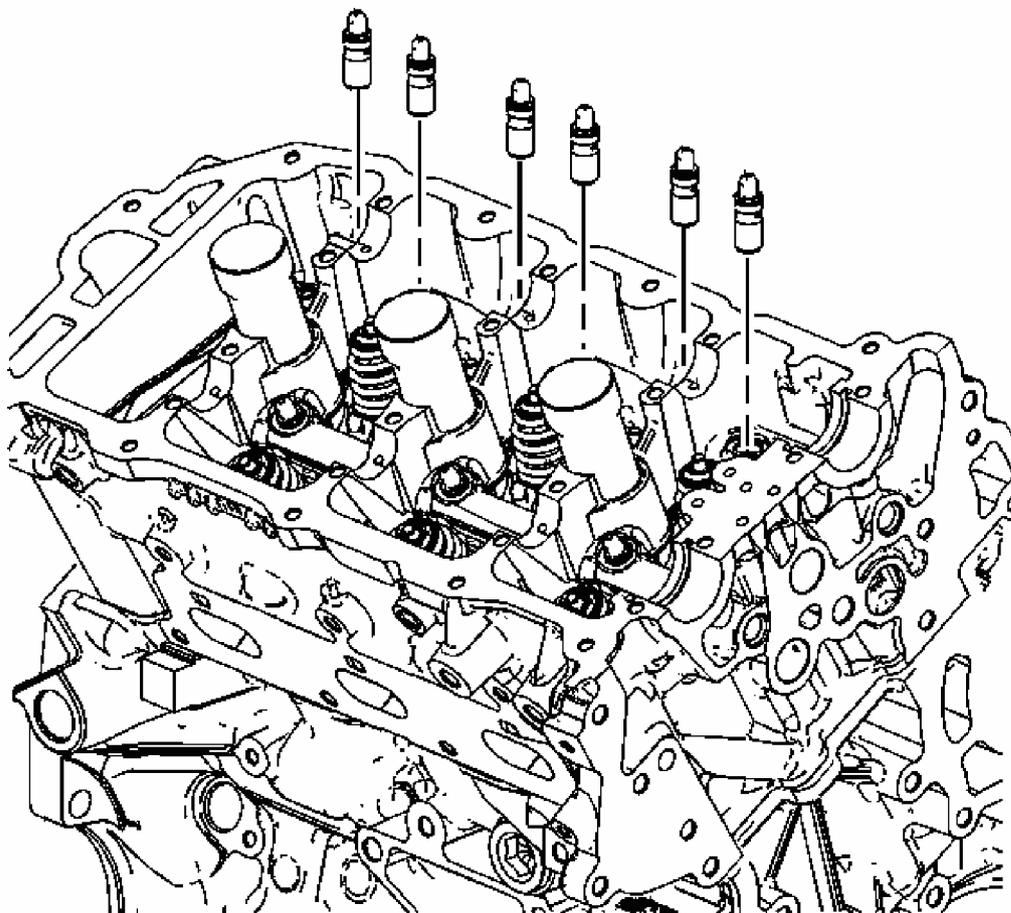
Identifying Stationary Hydraulic Lash Adjuster (SHLA)
